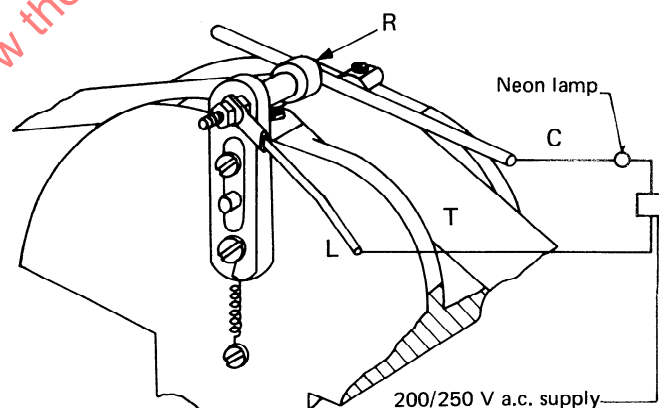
Enlarged view of indicating roller and electric circuit
